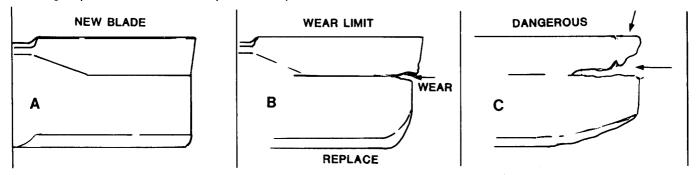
CUTTING BLADE TIP WEAR PATTERNS
